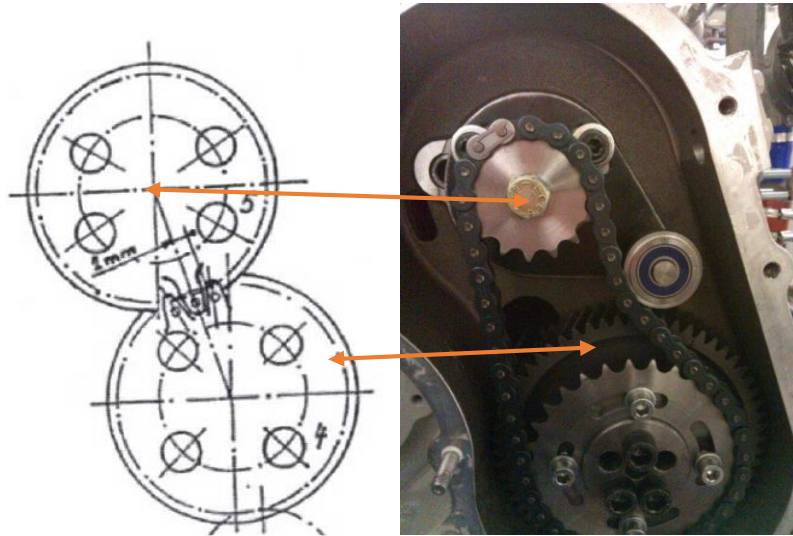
Valve train gear set modification: initial gear set scheme on the left and modified chain set on the right
